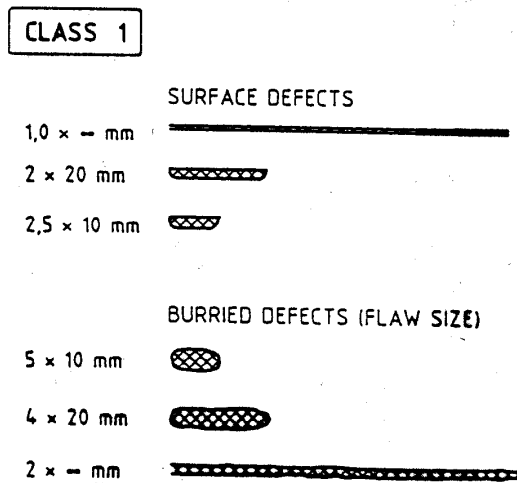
Accept criteria for defect sizes in spiral cases of welded high tensile stress steel plates.
